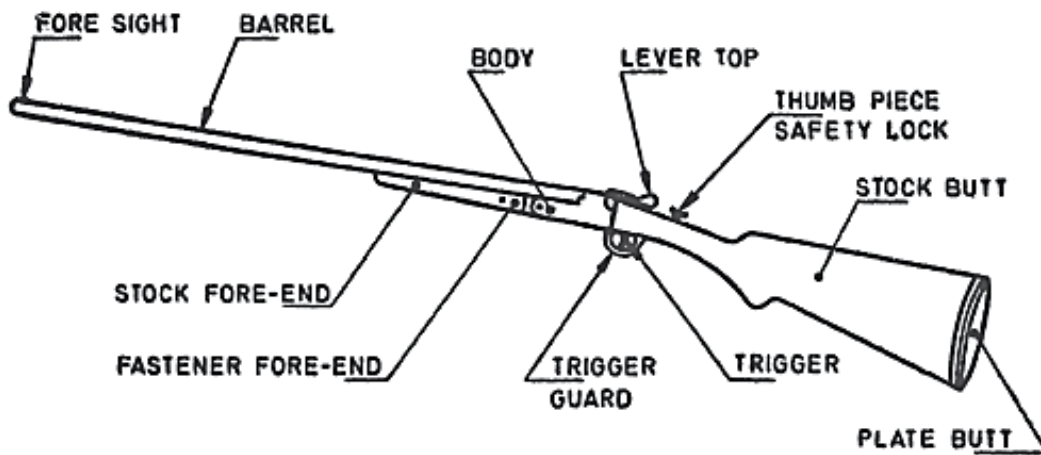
SINGLE BARREL BREECH LOADING SHOT GUN
